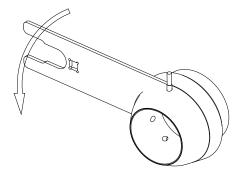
RPM-4 and RPM-5 Disassembly (57mm)
